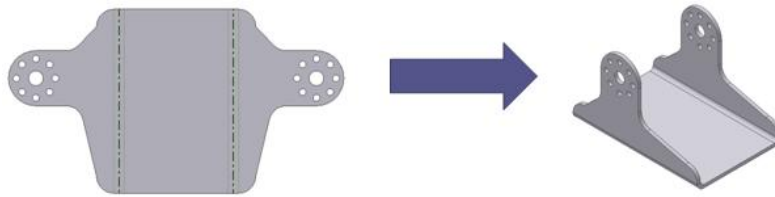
Example of cut-and-fold aluminum sheet metal component.
